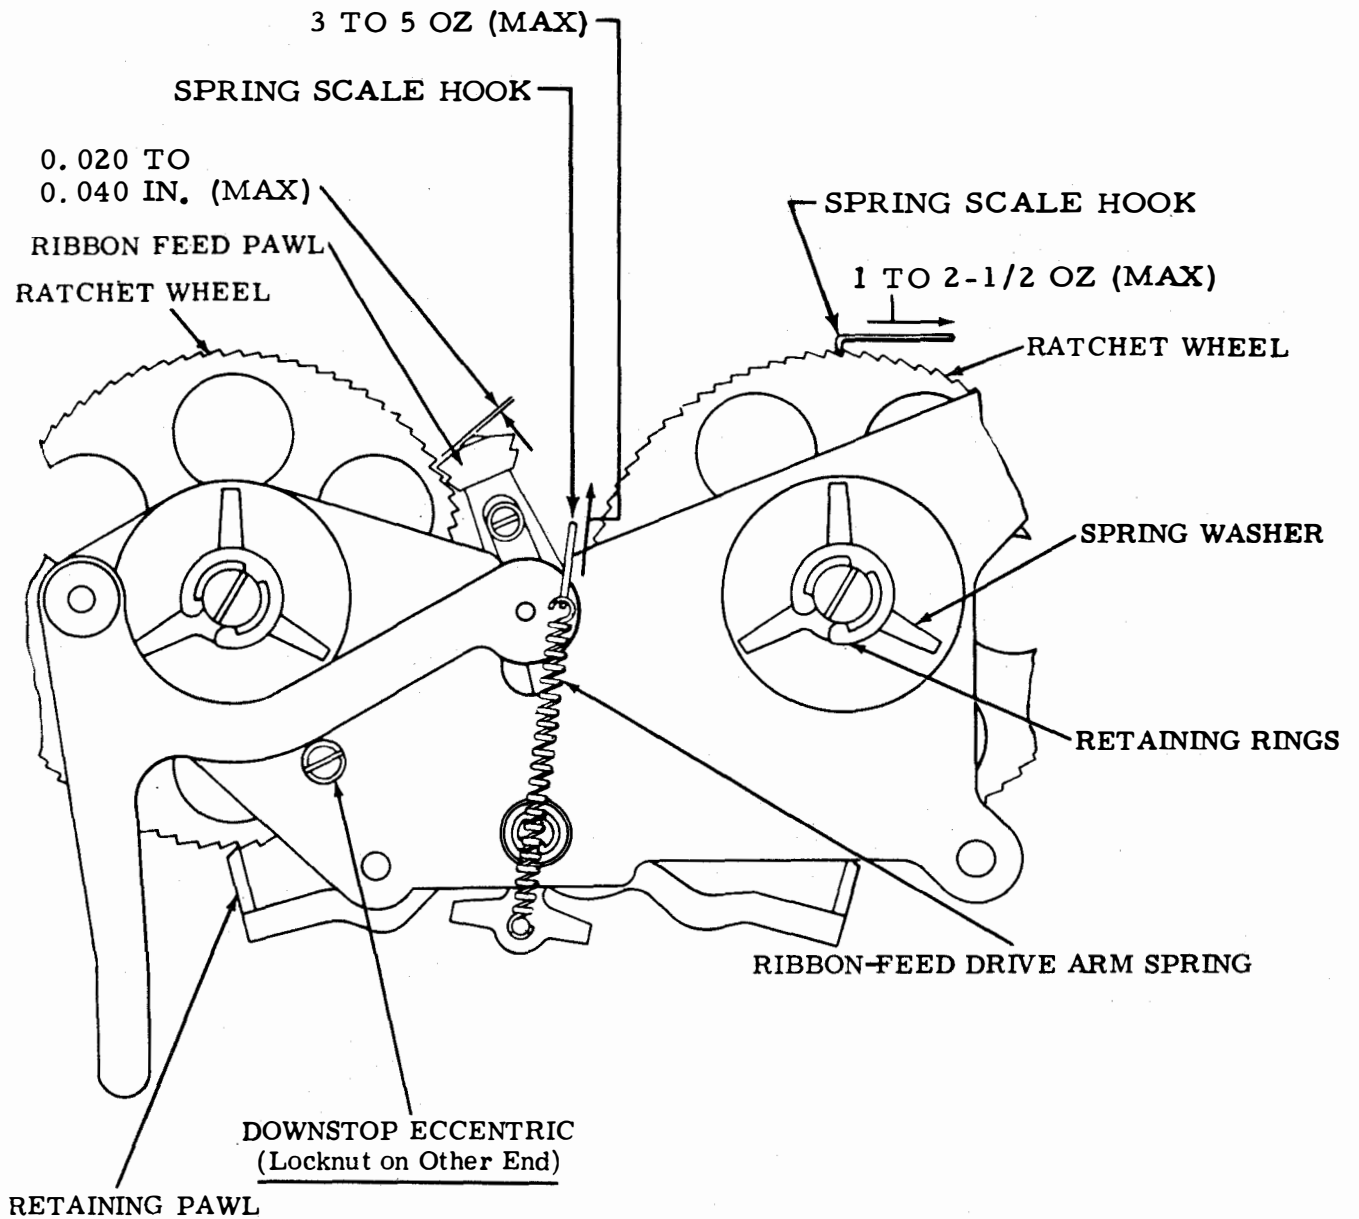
Ribbon-Feed Drive Arm Spring and Pawl Downstop Eccentric and Ribbon Ratchet Wheel Spring Washer - Rear View
